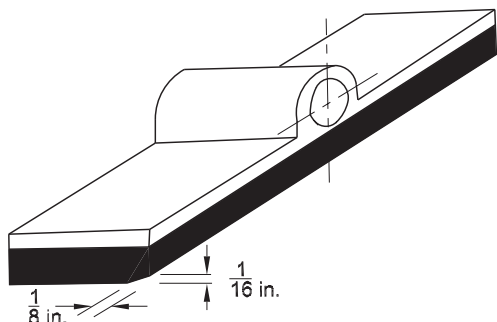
Slider Assembly Illustrating the Maximum Wear on Striking Edge
